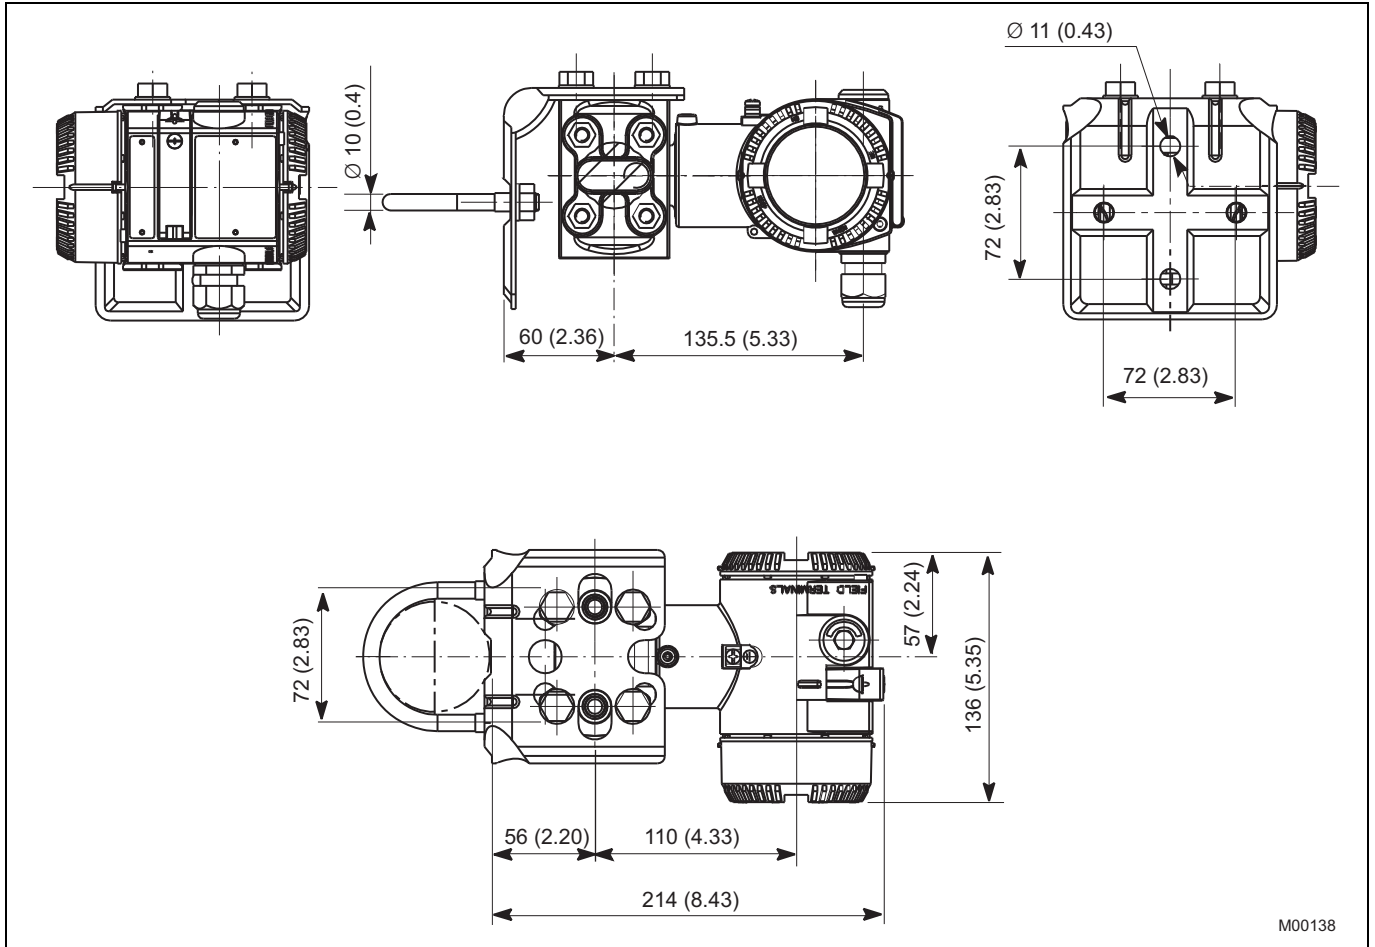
Dimensions in mm (inches), deviations in the drawing are possible
